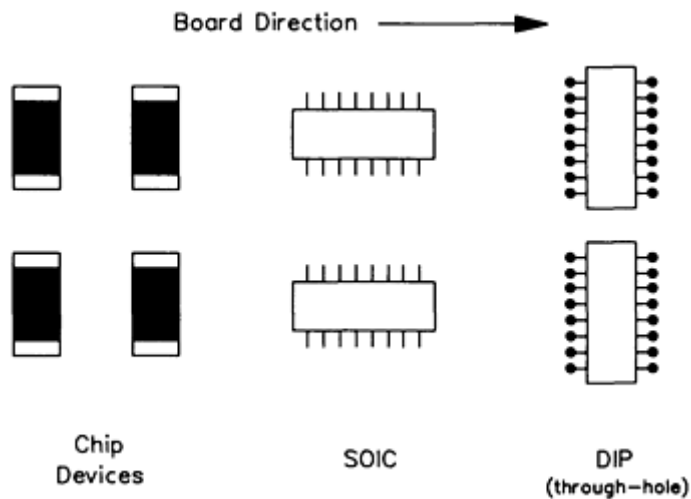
SCHEMATIC OF PREFERRED DEVICE ORIENTATION FOR WAVE-SOLDERED ASSEMBLIES. SOIC, SMALL-OUT-LINE INTEGRATED CIRCUIT (SURFACE-MOUNT); DIP, DUAL-INLINE PACKAGE (THROUGH-HOLE)
